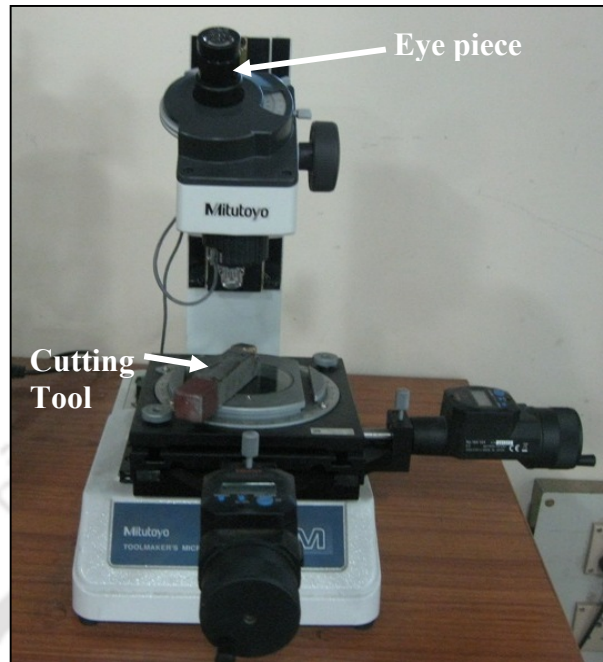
Tool makers' microscope used for measuring angles of cutting tool geometry
